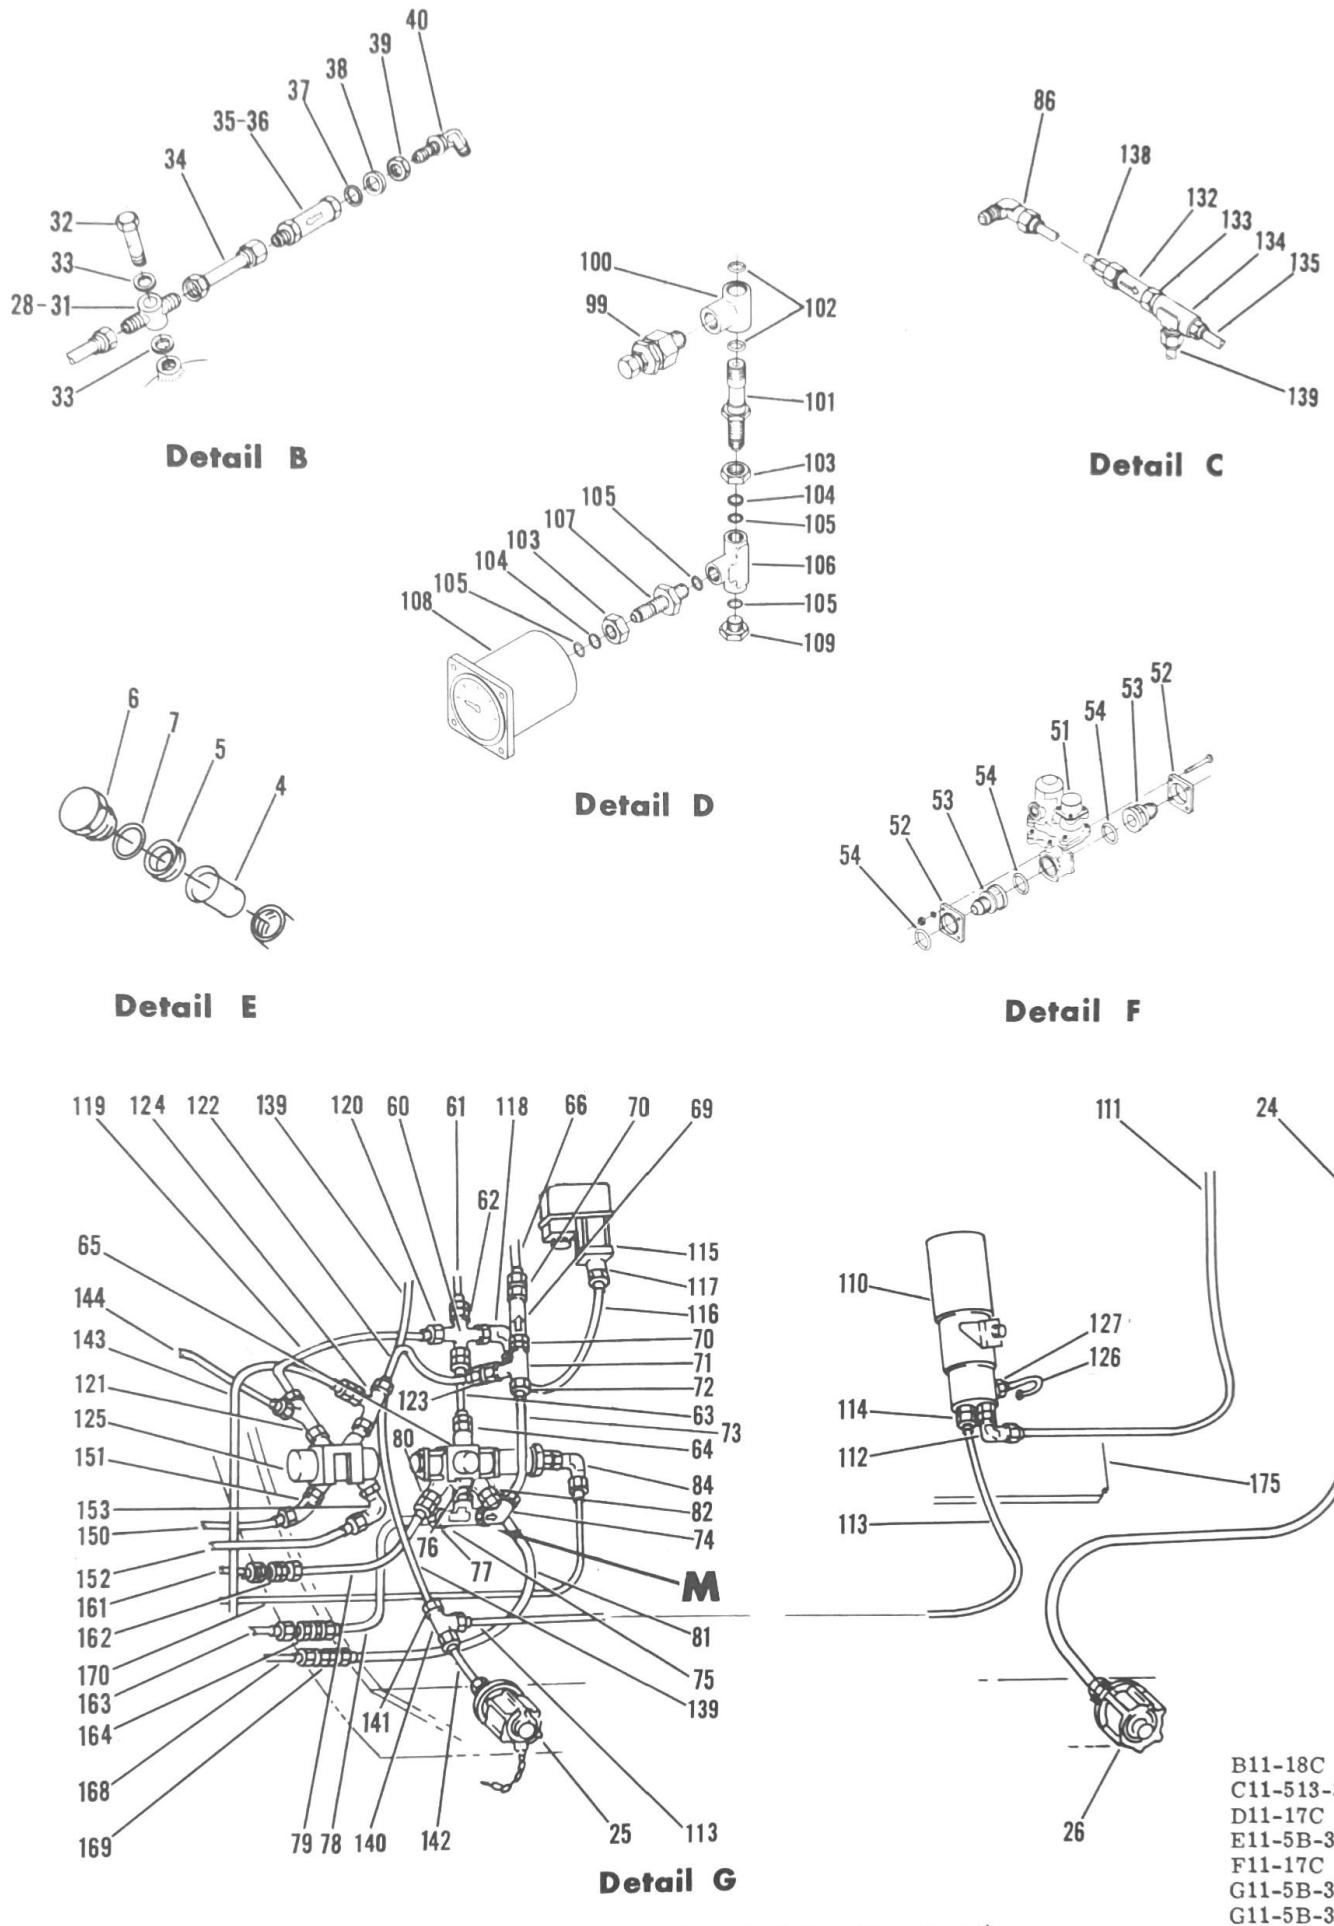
Tailcone Hydraulic Installation (Sheet 2 of 4)
